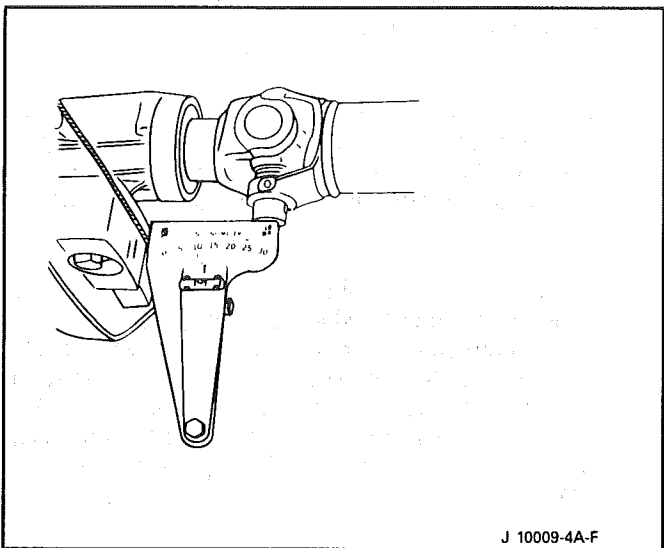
A-9 Angle Measurement Frt. Prop. Shaft Brg. Cap
